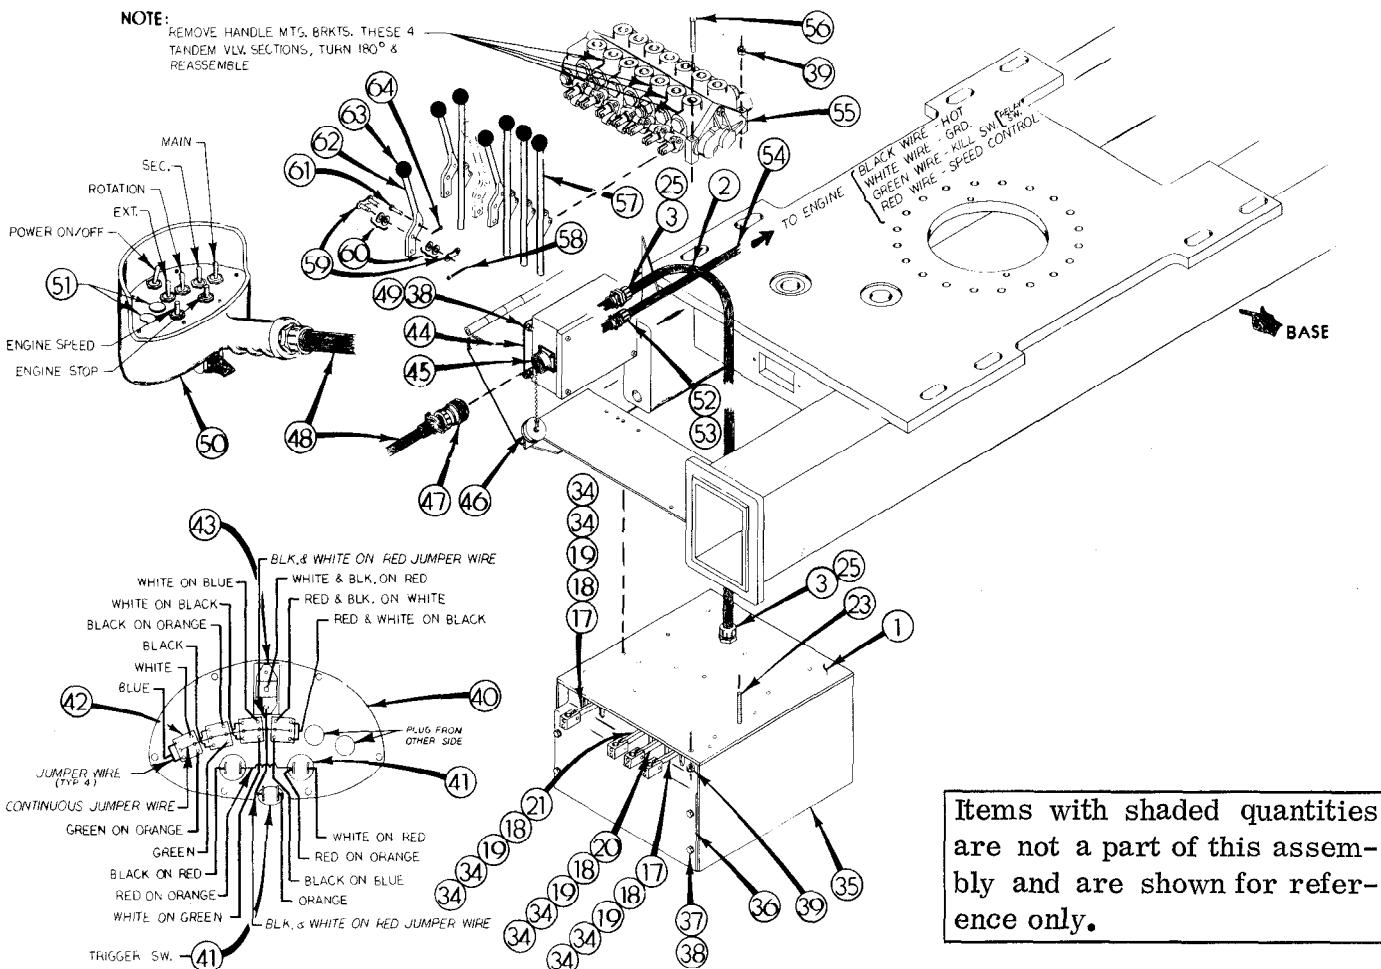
Remote Control with Power-Out Outriggers - Sheet 2 of 2
